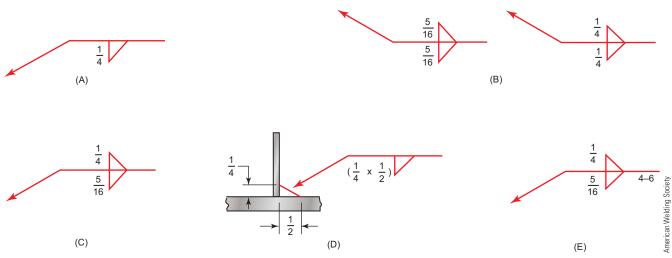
Dimensioning the fillet weld symbol.
